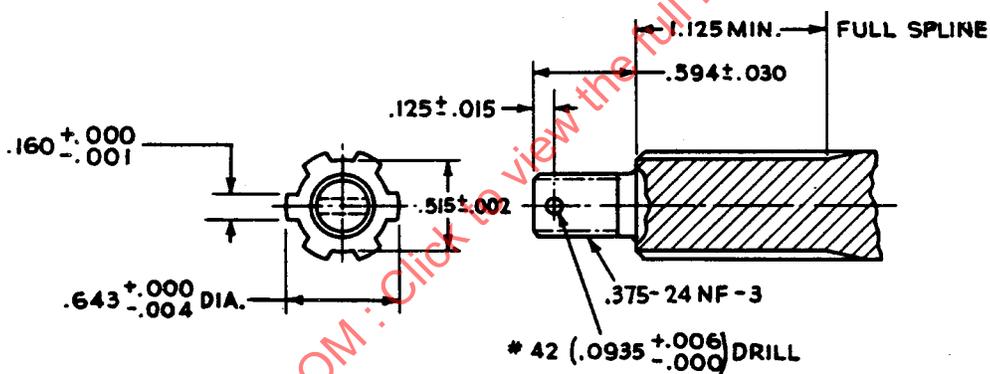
Coupling - Magneto Shaft (33 Teeth)
